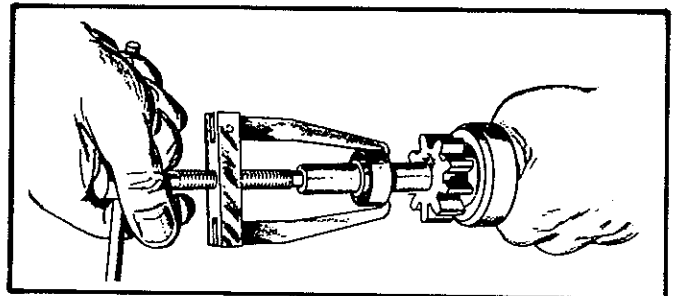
MOUNTING OVERRUNNING CLUTCH
